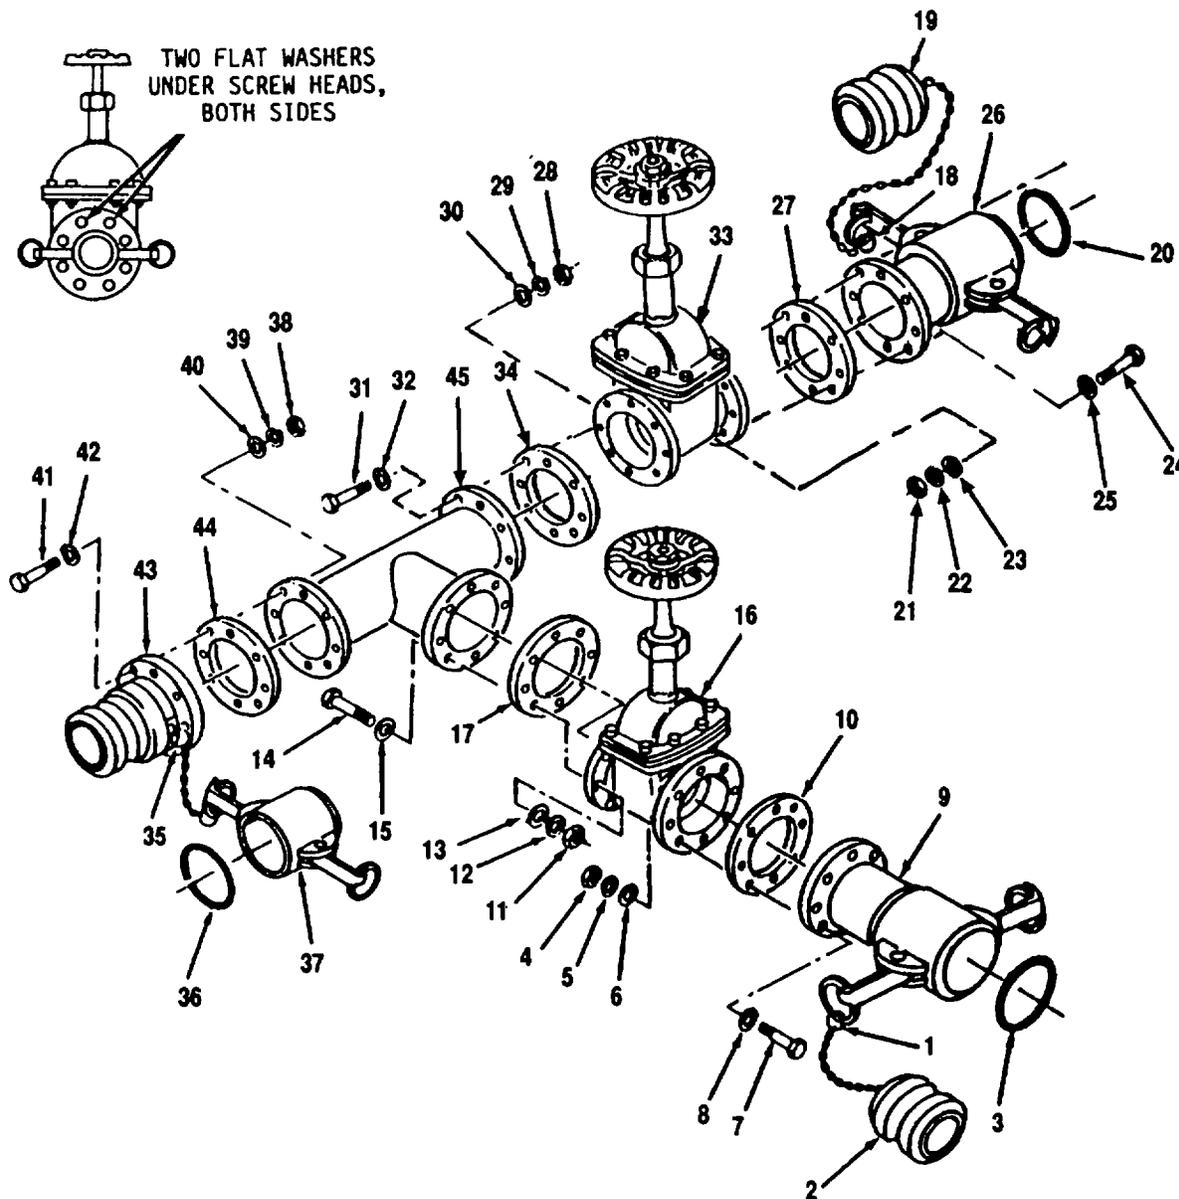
Tee and Dual Gate Valve Assembly (9148-Y1) Disassembly
